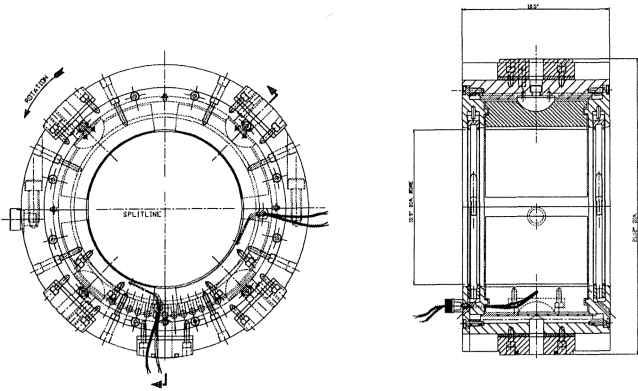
Self-Aligning Ball-in-Socket #2 Tilt Pad Bearing.
